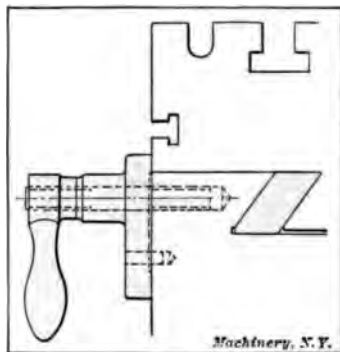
Clamping Plate for Edge of Milling Machine Table
